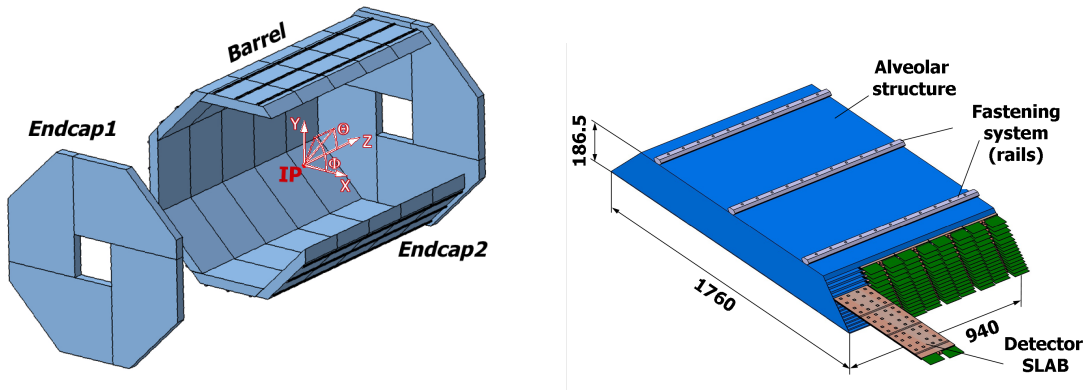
Global layout of the ECAL (left) and layout of one module (right).
